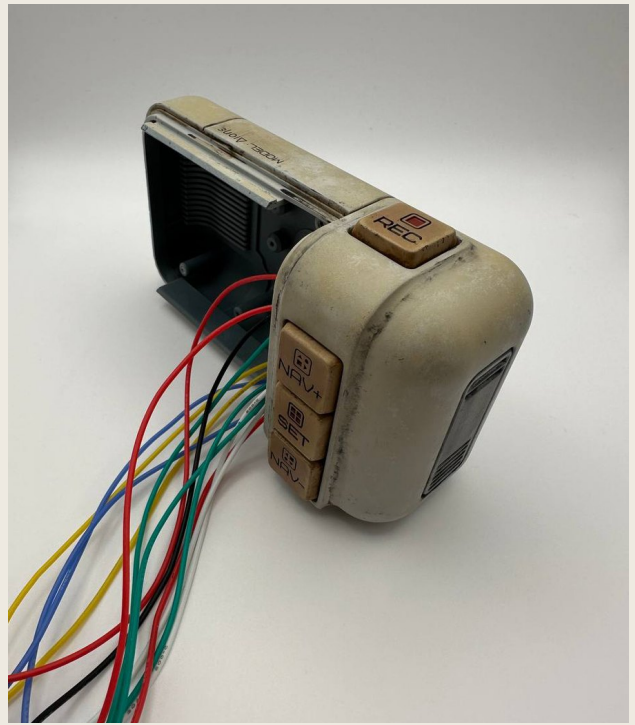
Switches and keycaps seated: REC on the top edge, NAV+ / SET / NAV- on the side; button wires exit for soldering.
